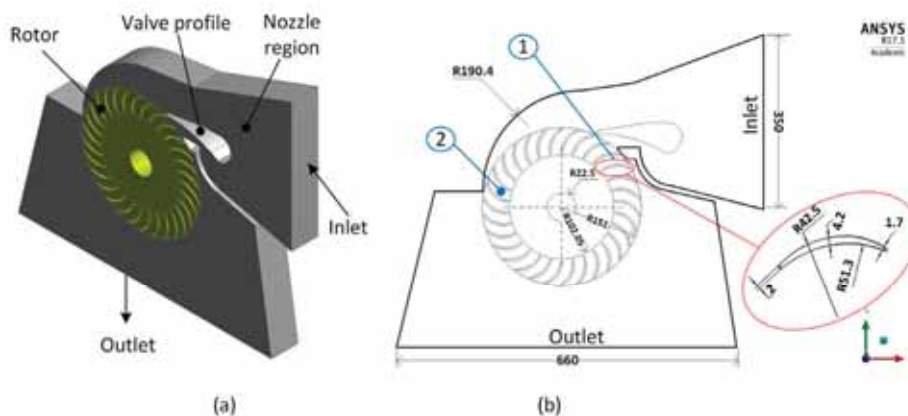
T15-300 cross-flow turbine design: (a) 3D geometry, (b) front view with detailed blade geometry.
